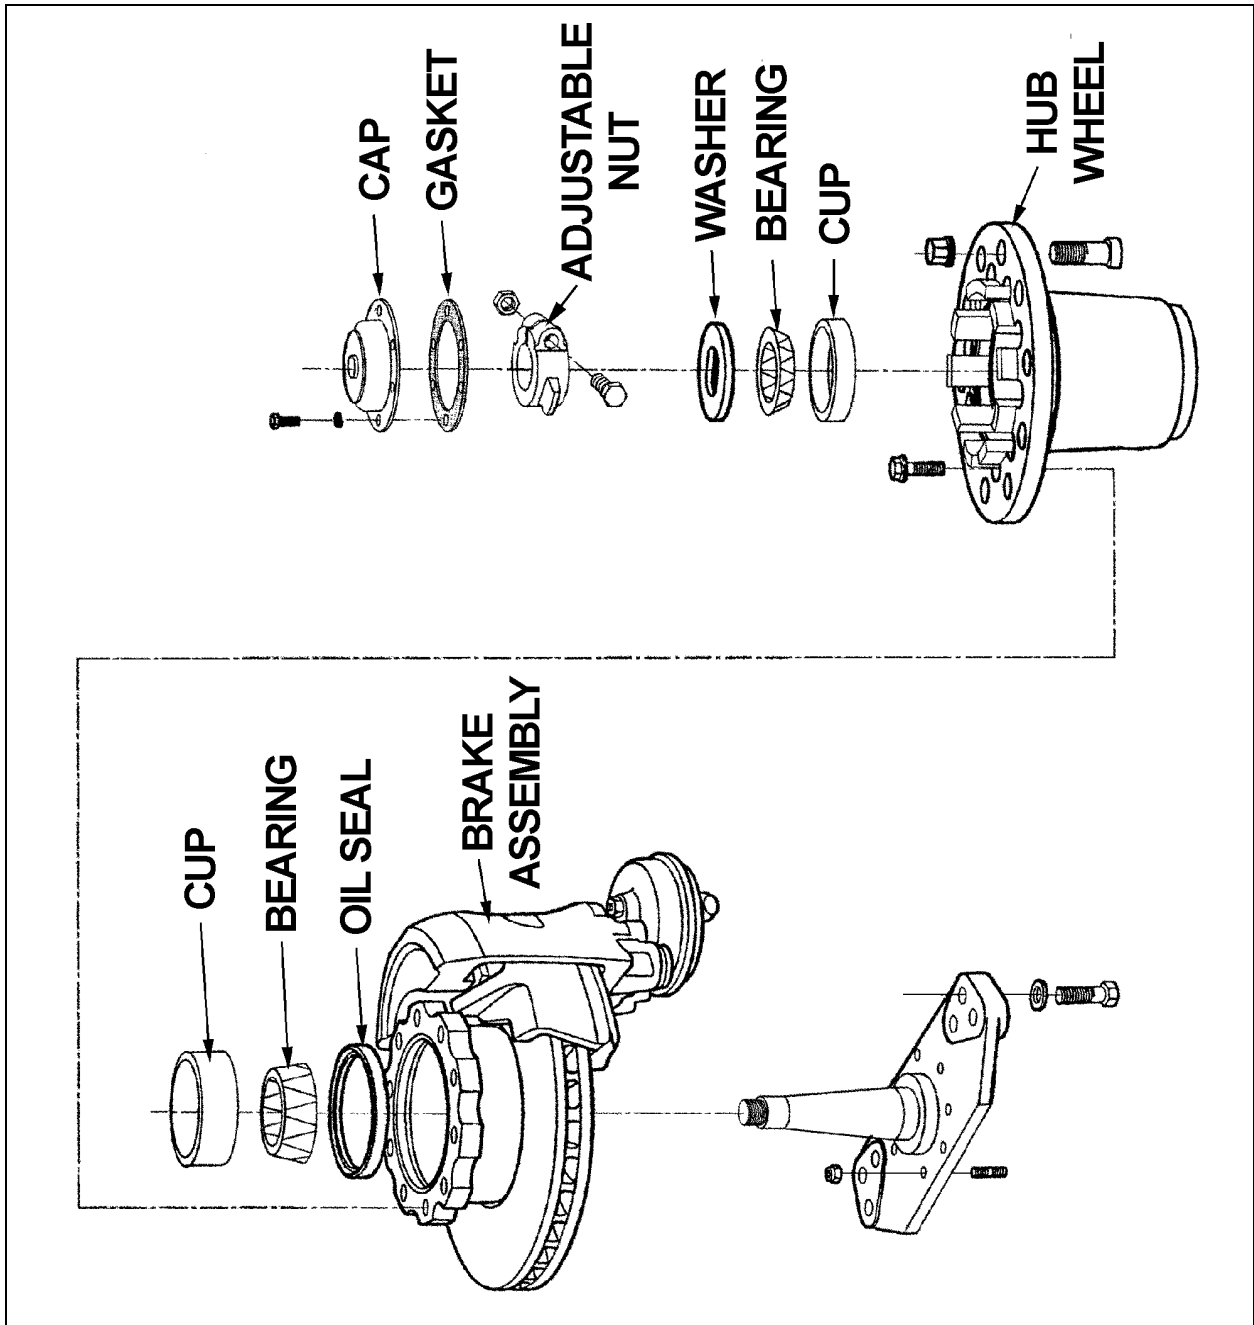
HUB AND ROTOR ASSEMBLY – TAG AXLE (TYPICAL)
